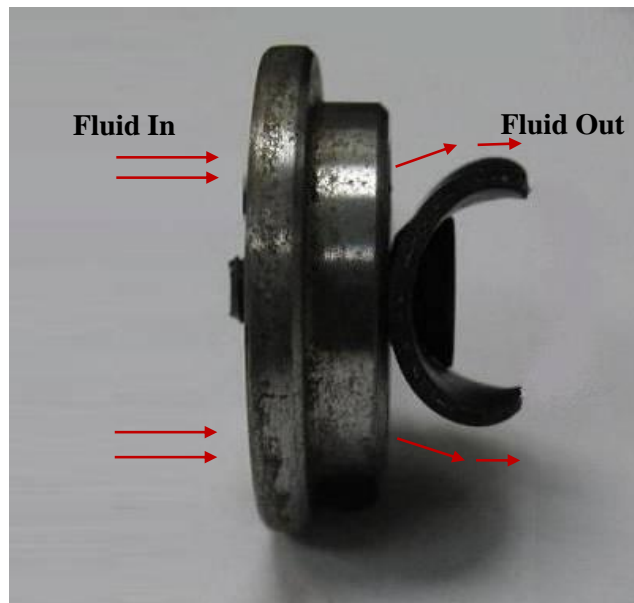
Flapper valve opens by flapping back and closes by folding back flat
